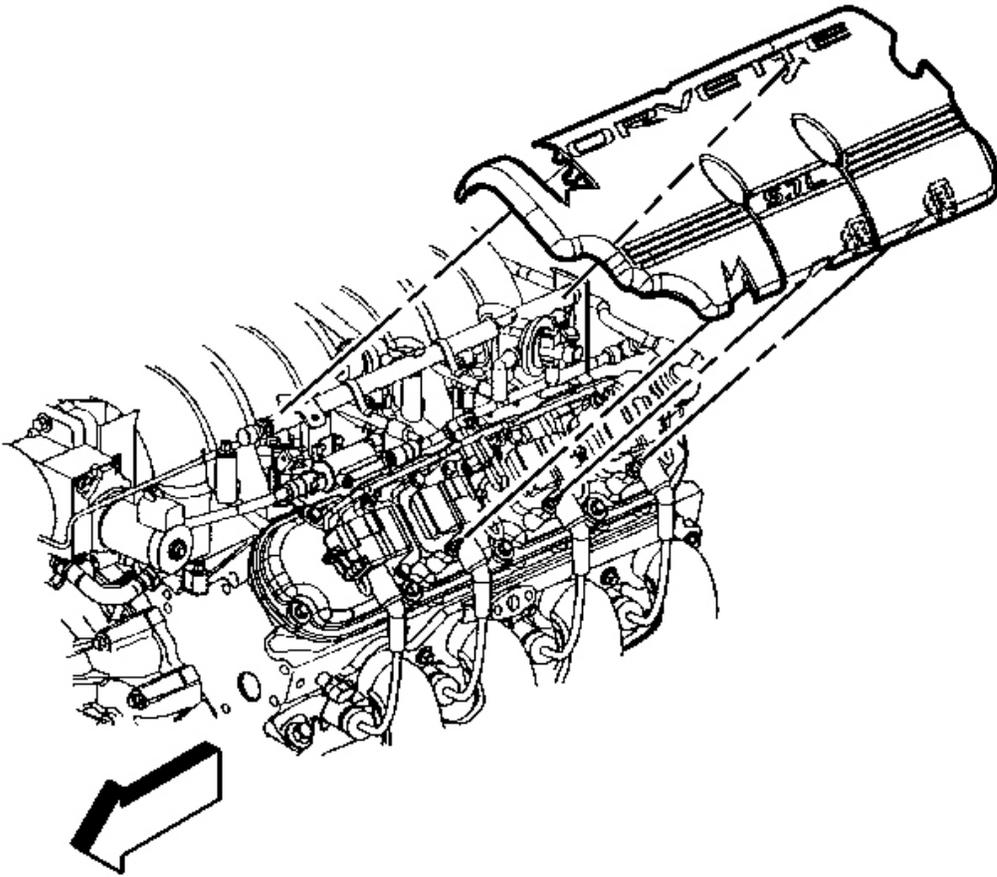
Chassis Fuel Pipe, Fuel Feed Hose & Fuel Rail
